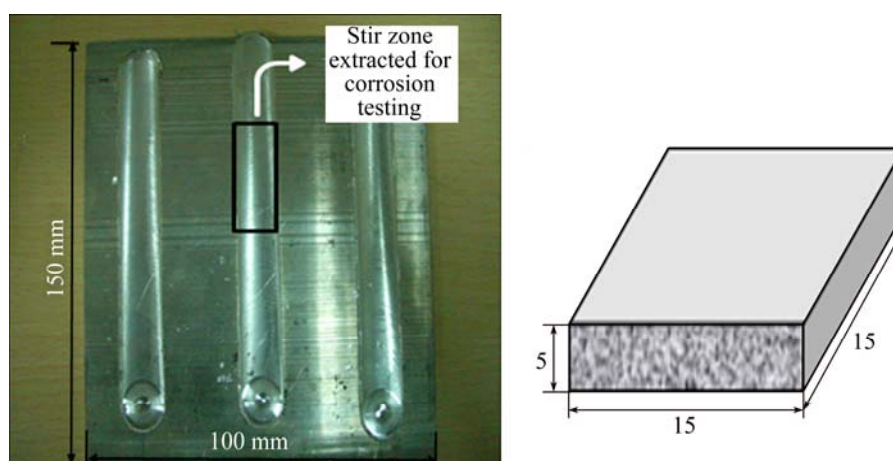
Extraction and dimensions of corrosion specimen (unit: mm)
